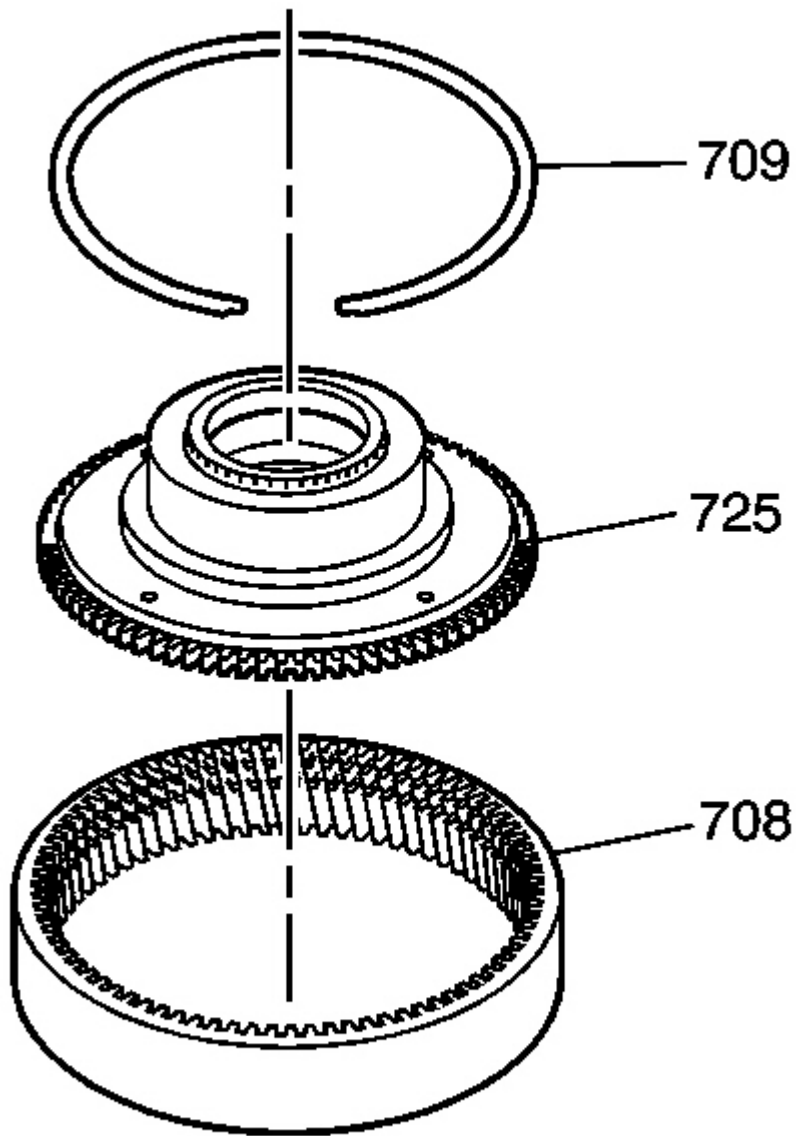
Locating Input Internal Gear, Snap Ring And Input Internal Gear Flange
